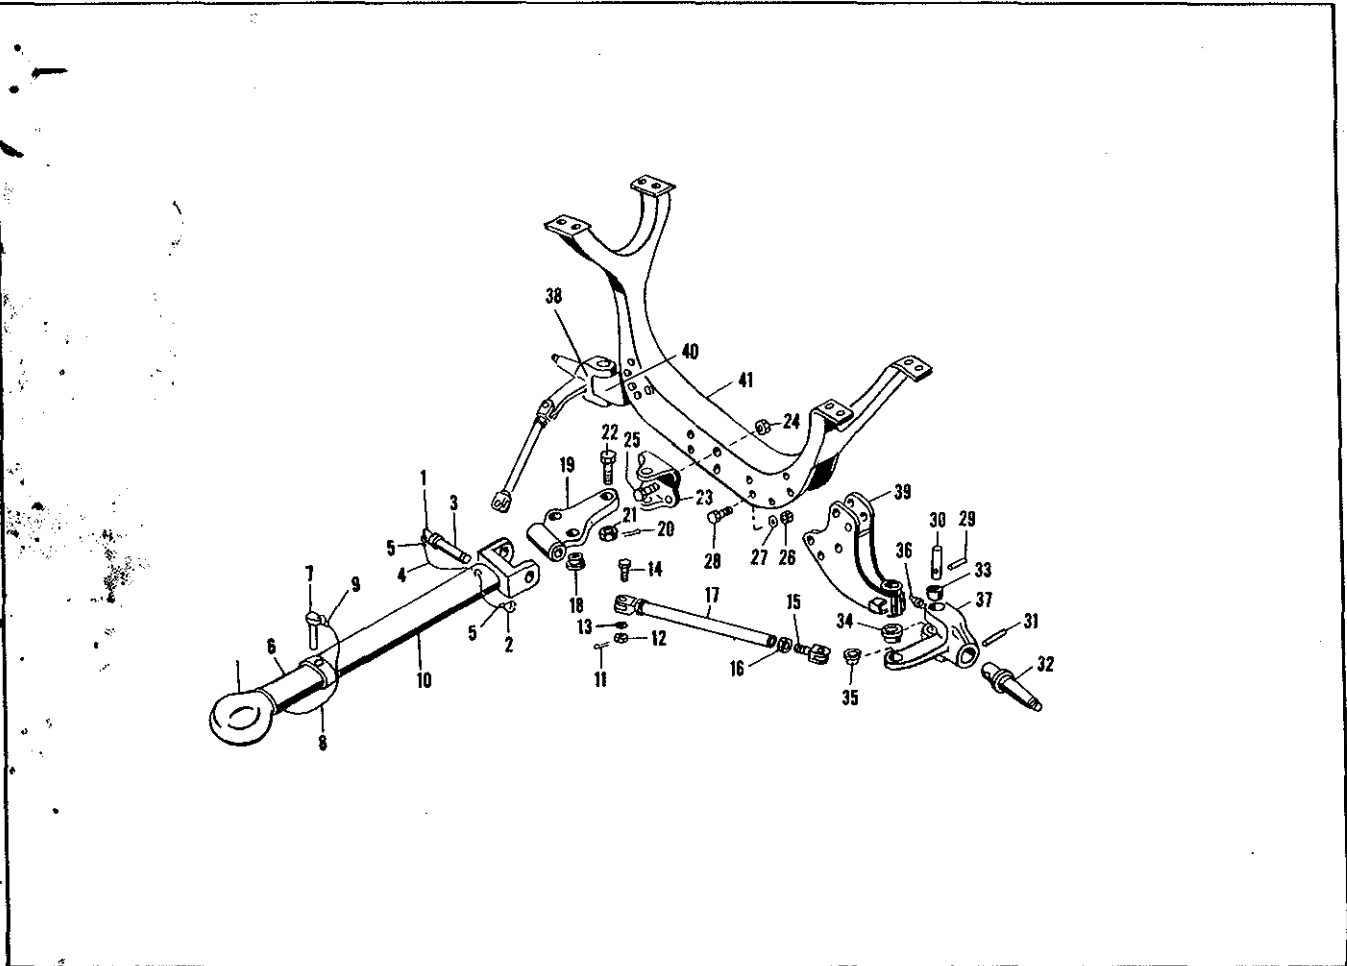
Forward Frame, Tow Bar and Steering Linkage Assembly
